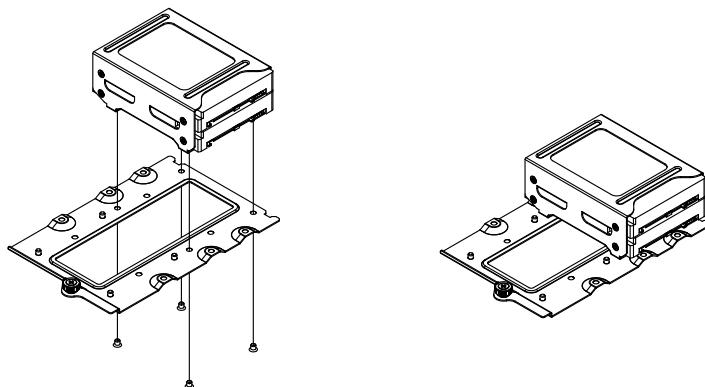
Securing the Bracket to the HDD Tray (2.5" Drives)
